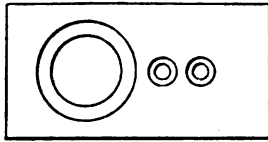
Cast Iron Body Die, used with Tool Steel Bushings
